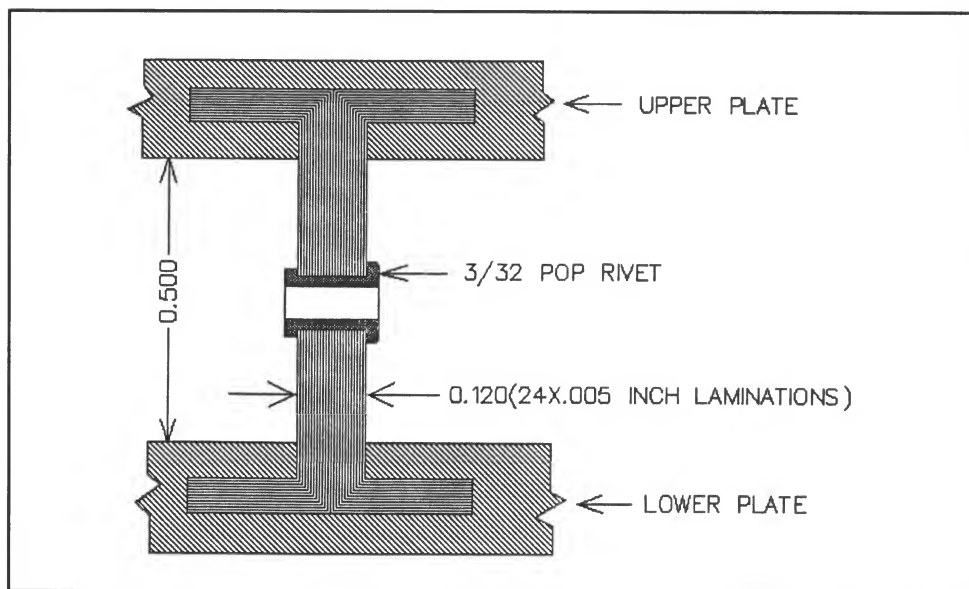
Sketch showing a cross-section view of the Recoil Isolator laminated flexural beams.
